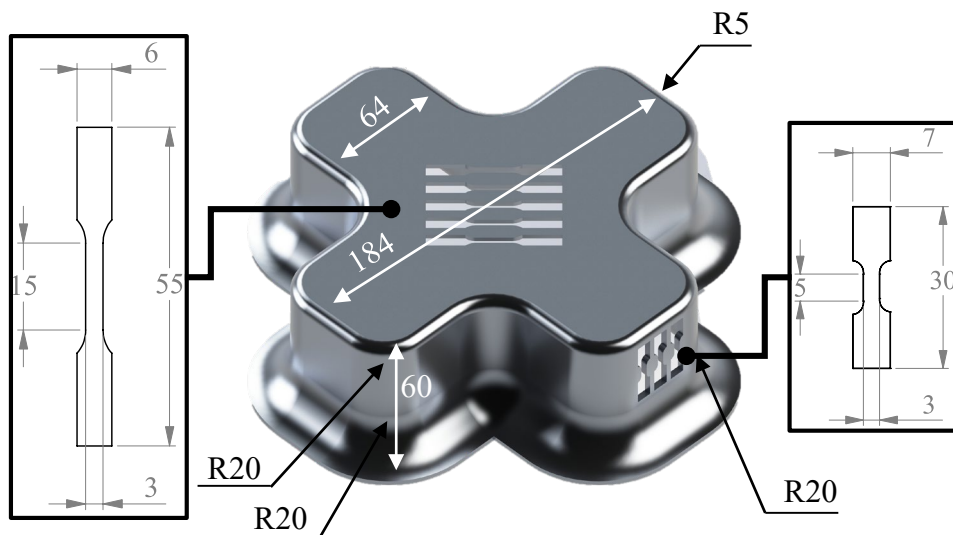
Tensile specimens extracted from the completely formed cross-die (dimensions in mm)
